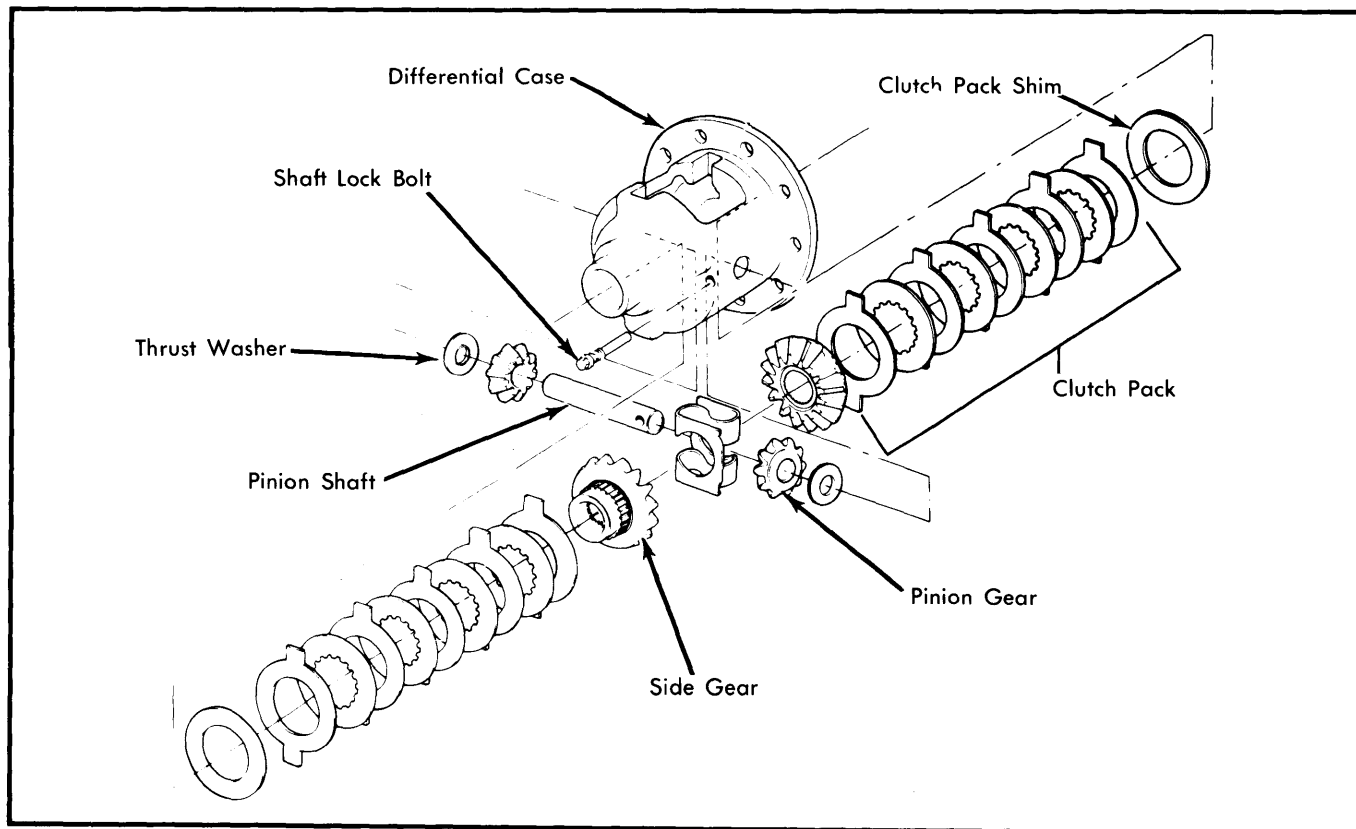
Exploded View of Ford Motor Co. Traction-Lok Differential
